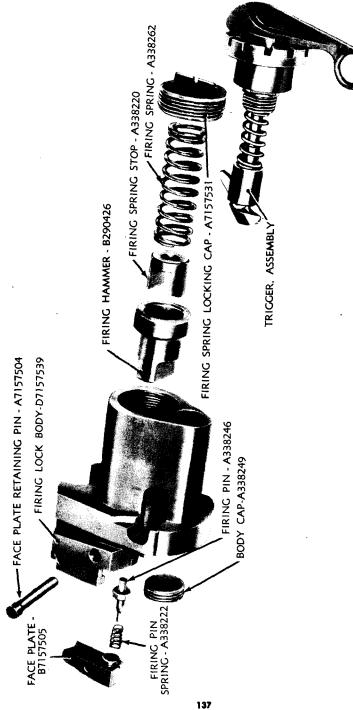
Trigger Assembly and Firing Hammer and Spring — Exploded View
